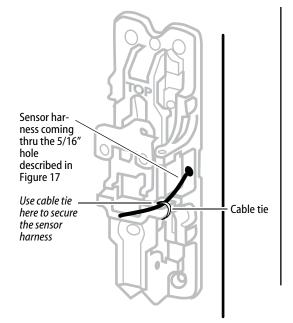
Using cable ties to hold wires for Precision 2200, 2700, and 2800 exit devices
